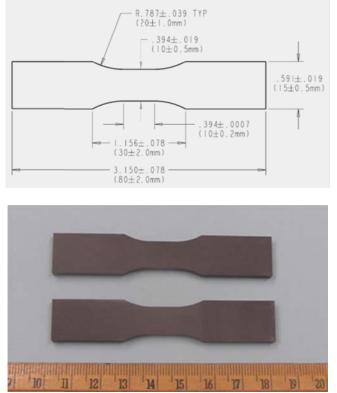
(Top) Dimensions of ISO 8256 Type 3 Tensile Specimens and (Bottom) Examples of Tensile Bars Machined out of EDM-3 Graphite. The Scale is in Centimeters.
